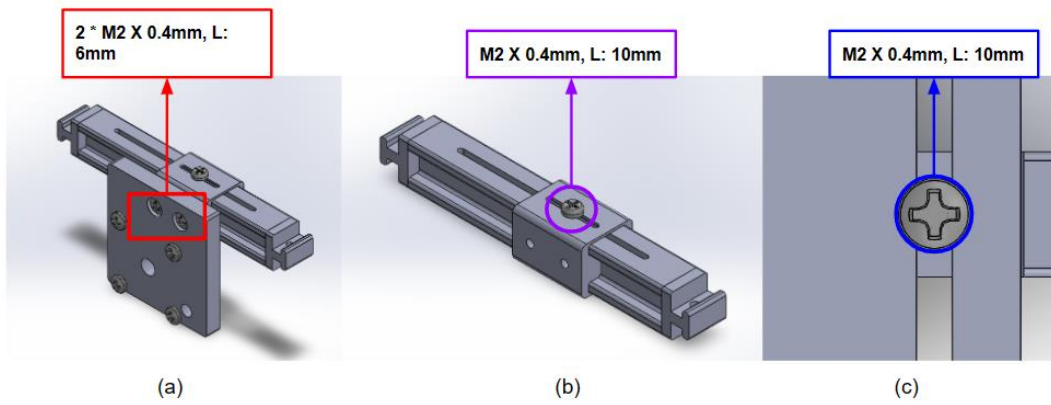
Screw fixation design. (a) between the four-bar mounting plate and the I-beam slider; (b) between the I-beam slider and the I-beam; (c) between the E-shaped end cap and the front/black plate.
